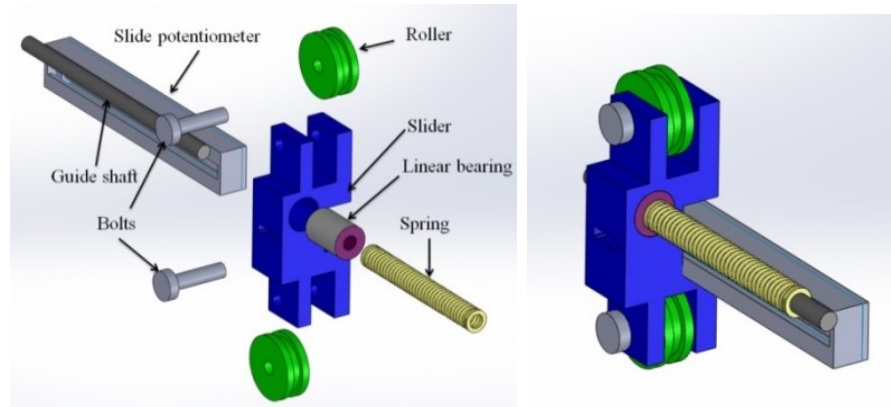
Hybrid pre-tension mechanism wire routing slider part
